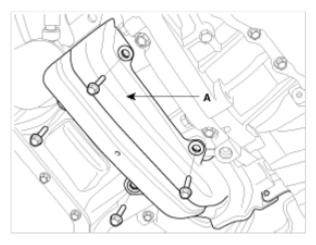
Identifying Bracket Courtesy of HYUNDAI MOTOR AMERICA
